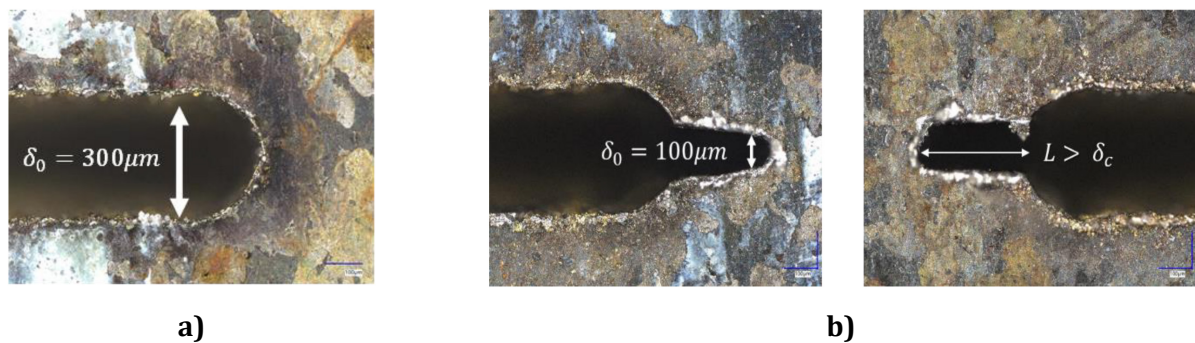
a) EDM pre-cracking, b) pre-cracking with a razor blade
